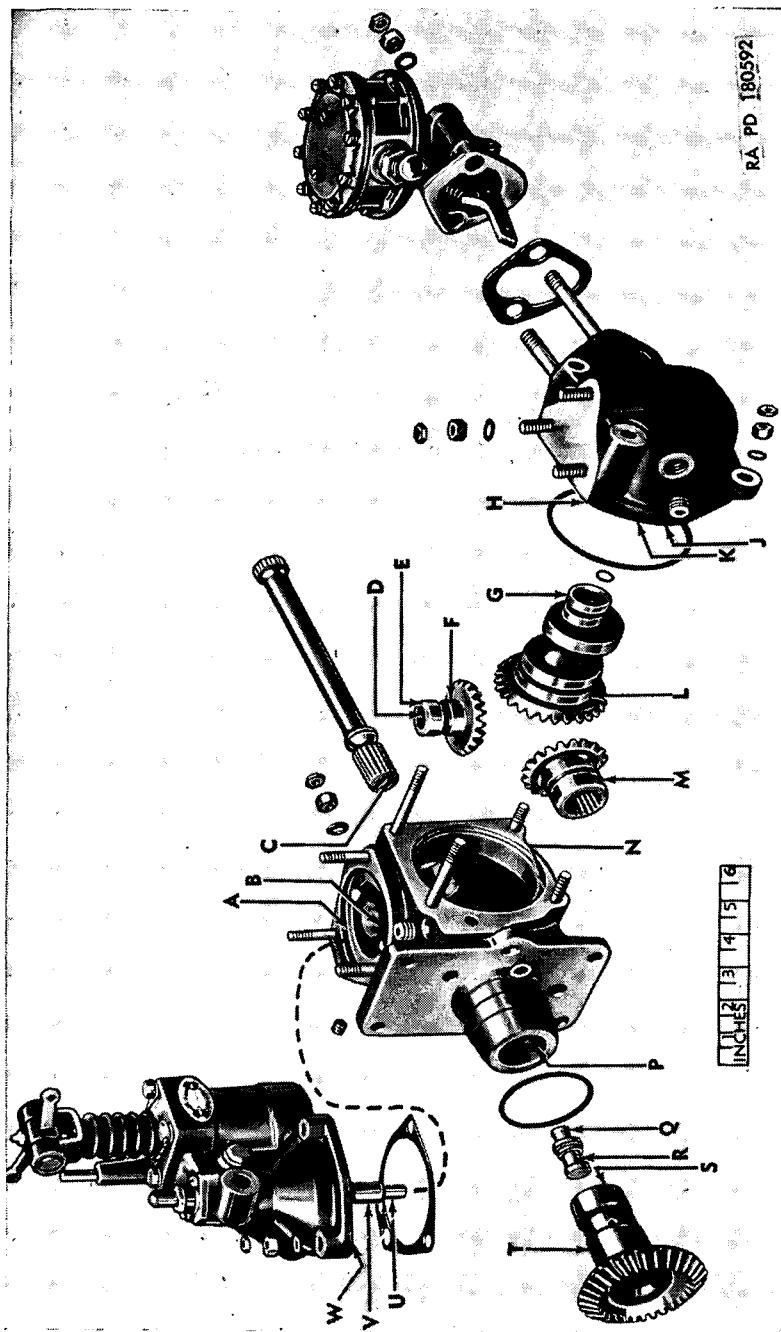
Repair and rebuild standard points of measurement for governor drive, fuel pump and camshaft drive housing.
